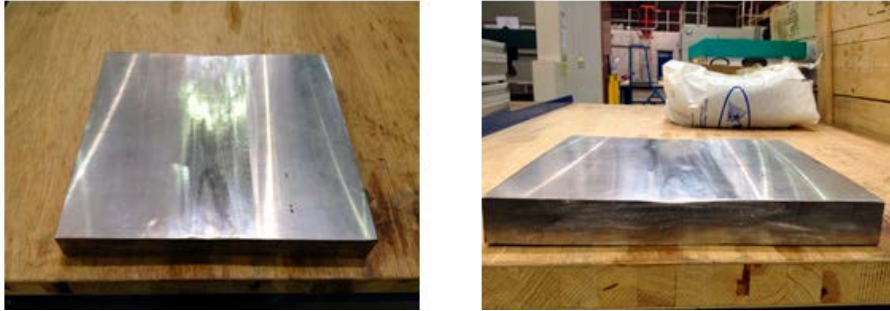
Multi pass austenitic stainless steel weld
